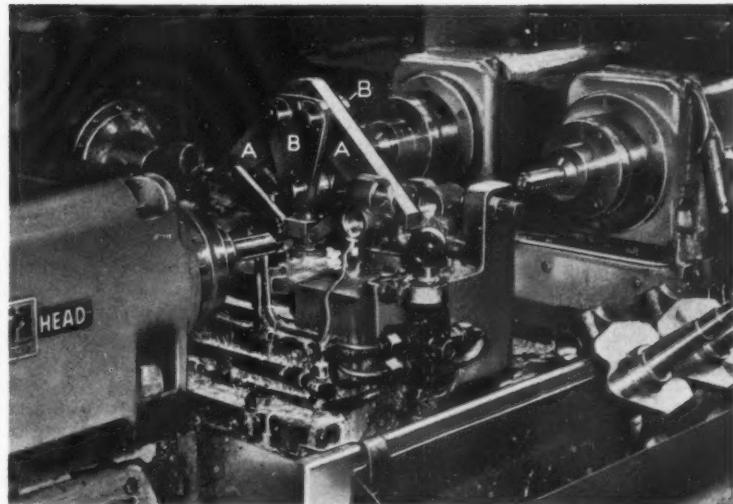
At This Set-up on a Heald 4-spindle Machine, the King-pin Holes are Fine-bored in Two Components at a Time. The Fixture is Pneumatically Operated
